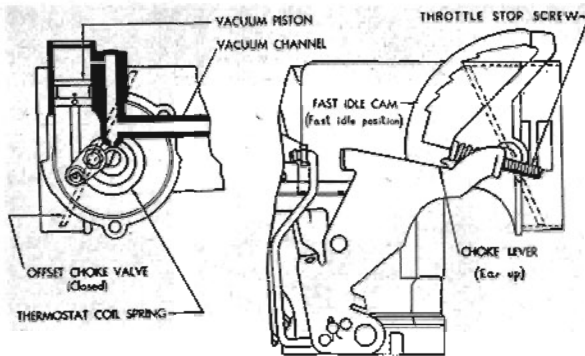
AUTOMATIC CHOKE—ENGINE COLD
